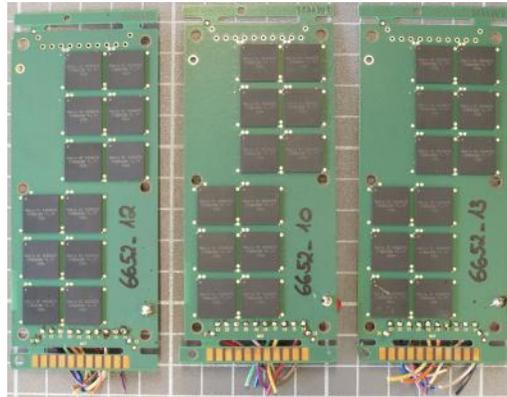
Assembled coupons (TV1) for thermo cycle testing
